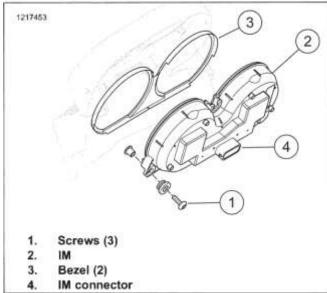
Instrument Module: Frame-Mounted Fairing
